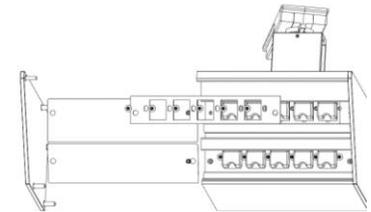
Remove the primary gels, then remove the 6x screws and face plate to access LED.
